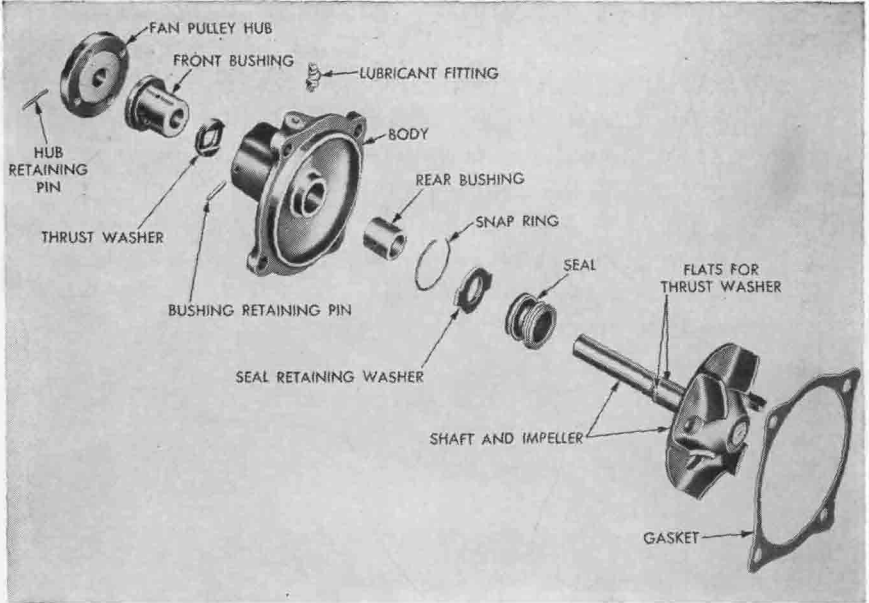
Disassembled view of water pump used in a V-8 engine. (De Soto Division of Chrysler Corporation)
